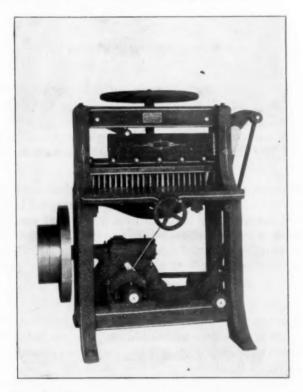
Photograph of Paper Cutting Machine, Showing Clutch Mechanism to be Brought out by Photographic Methods
